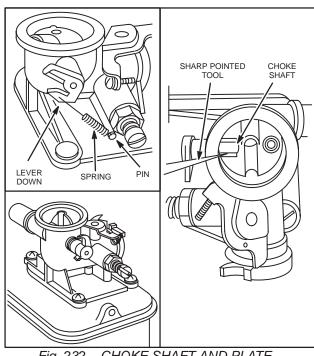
CHOKE SHAFT AND PLATE – CHOKE-A-MATIC®
